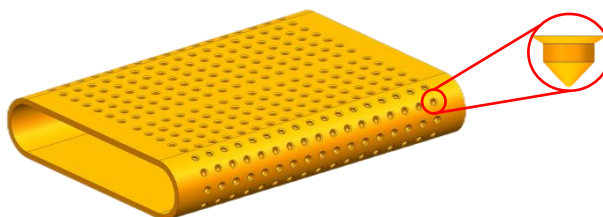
Geometry of the conical–cylindrical metering cell with a hemispherical bottom
